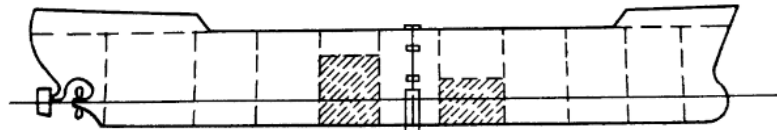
Welding and partly debalasting of hull parts in welding seam area
